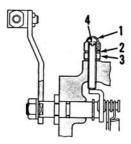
Maximum no-load engine speed may be adjusted after removing cap nut (1) and washer (2). Loosen locknut (3) and turn screw (4) to adjust engine speed as outlined in text.
